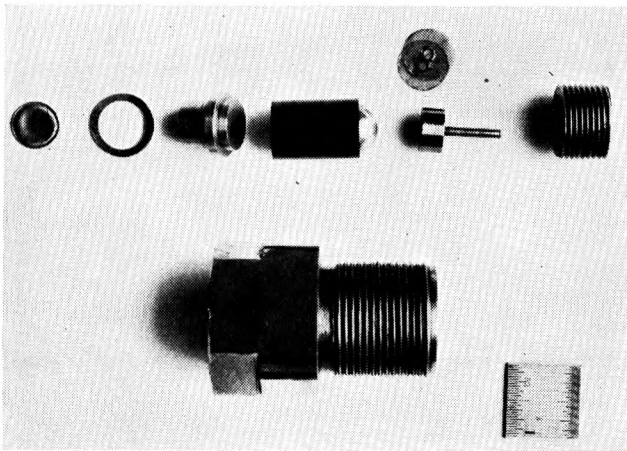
PHOTOGRAPH OF PARTS OF GAGE
